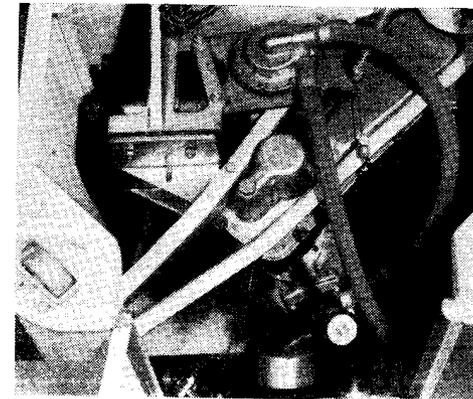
This view of the mechanism with the washing machine inverted shows the pump and the method of mounting the gearbox
